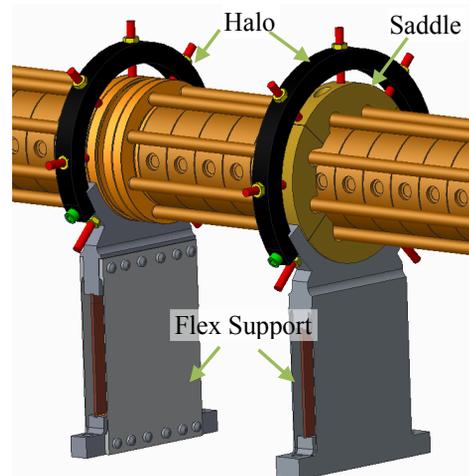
Section of Linac structure with supports: left - SLAC riveted assembly, right - ANL EDM assembly.
